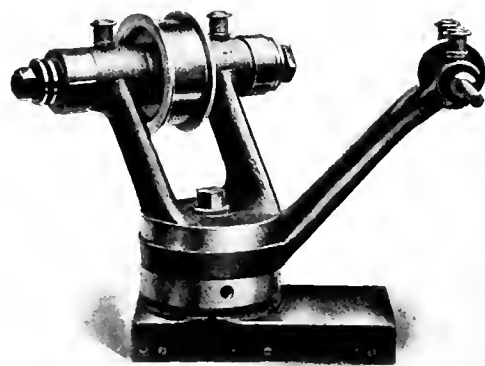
Wheel Head of Universal Machine showing Vertical Adjustment and Permanently Mounted Internal Grinding Spindle
